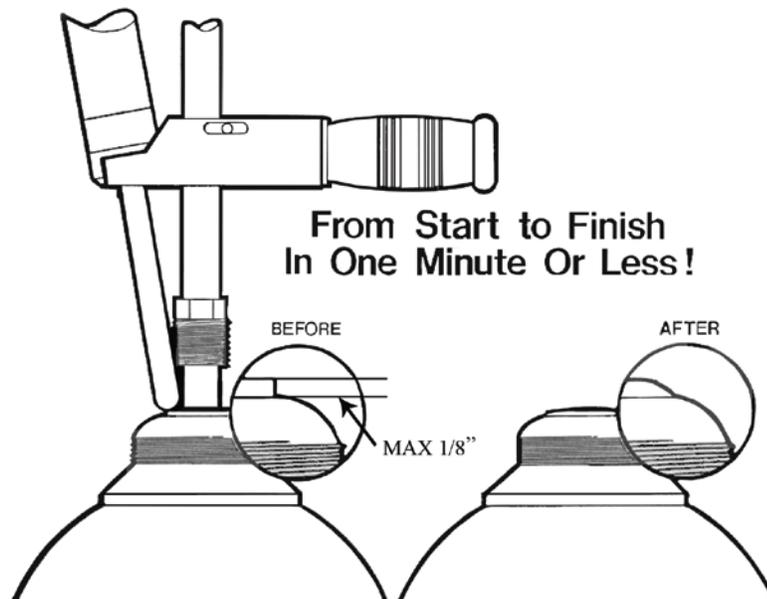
NPT-1010 COLLAR ATTACHMENT TOOL
